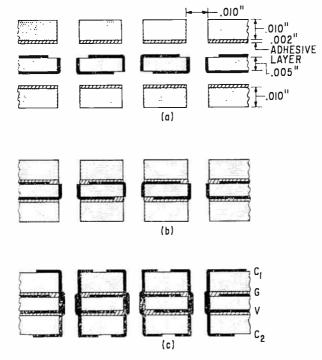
Cross section of experimental four-layer circuit board fabricated with a sequential laminating technique.
